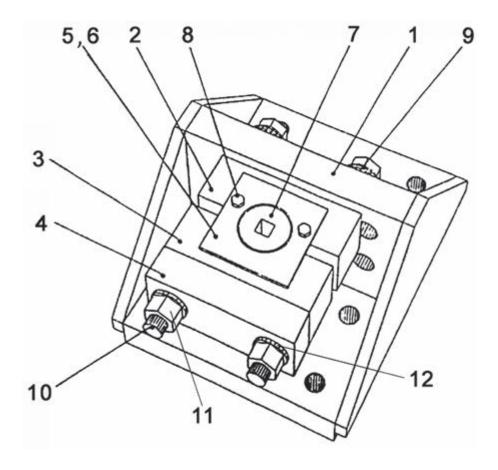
Brake device, small — For machines with shaft sizes 6,3 mm, 10 mm, 12,5 mm and 16 mm
